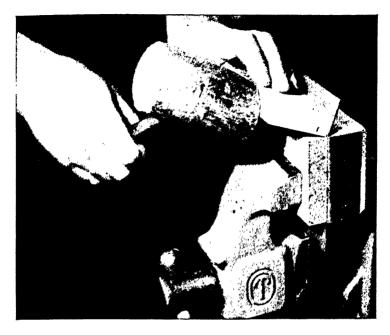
Bending the corner between blocks of wood held in the vise.
